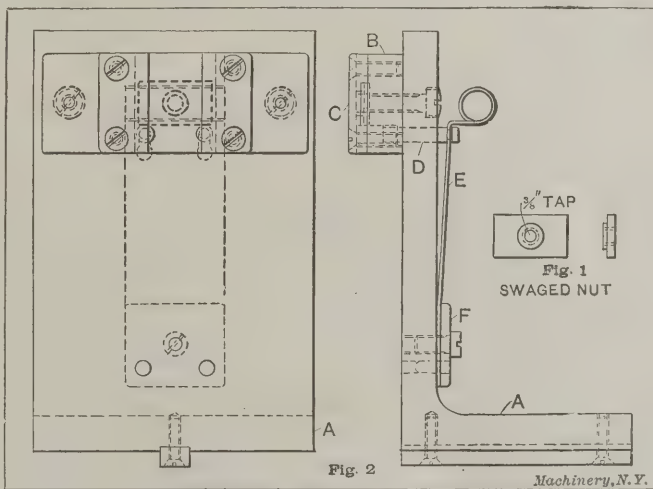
The Swaged Nut. Fig. 2. The Fixture used for Holding the Nut while tapping
